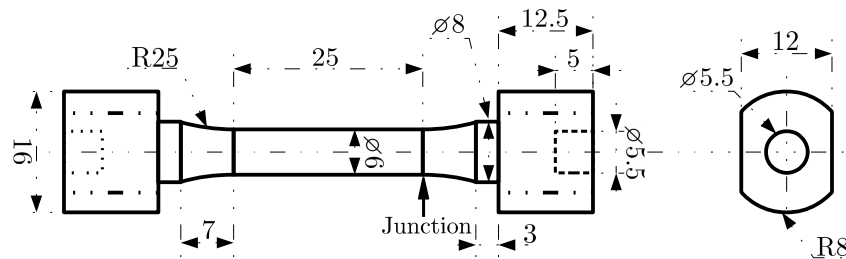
Geometry of fatigue specimens used for 2D surface monitoring of crack initiation and propagation (dimensions in millimetres).
